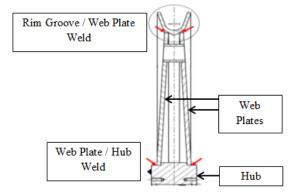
DUAL WEB DESIGN SHEAVE ASSEMBLY - WELD LOCATIONS IN RED (OEM PIB#87819987)
